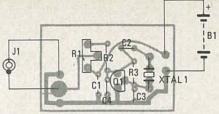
OUTPUT JACK, J1, can be mounted on PC board by drilling out large foil pad *completely* and running resistor lead to trace leading to it.
